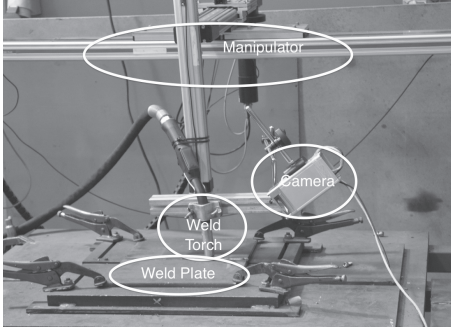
The configuration of the experiments platform, including an industrial camera equipped with optical filters, a manipulator and a welding machine.
